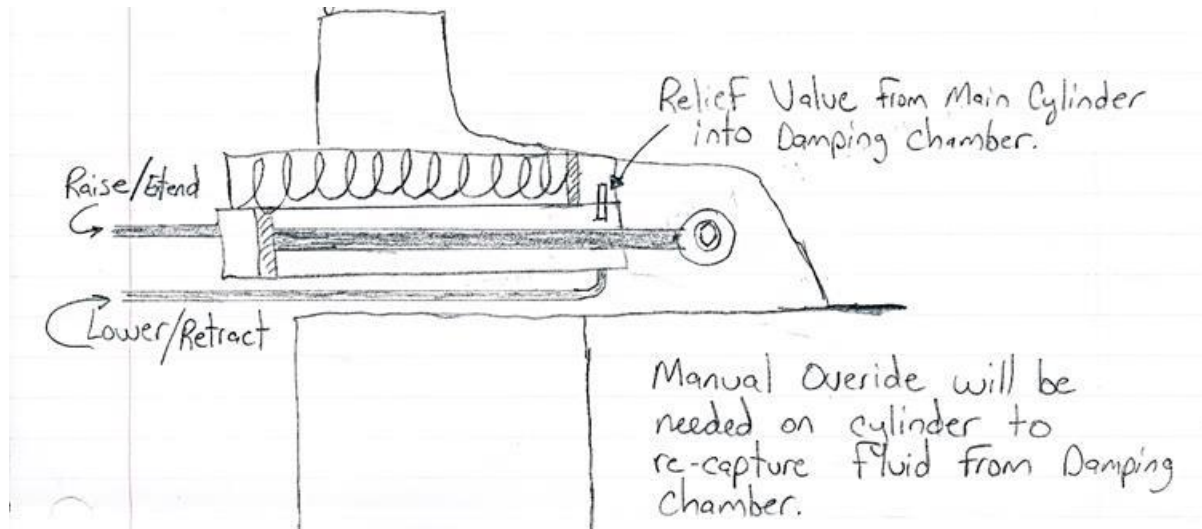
Design concept 4 Externally Mounted Internally Relieved Cylinder
